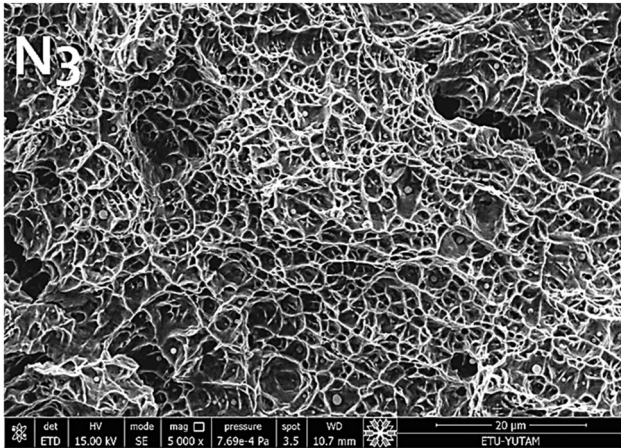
Fractured surface SEM image of the N3 specimen after impact test.
